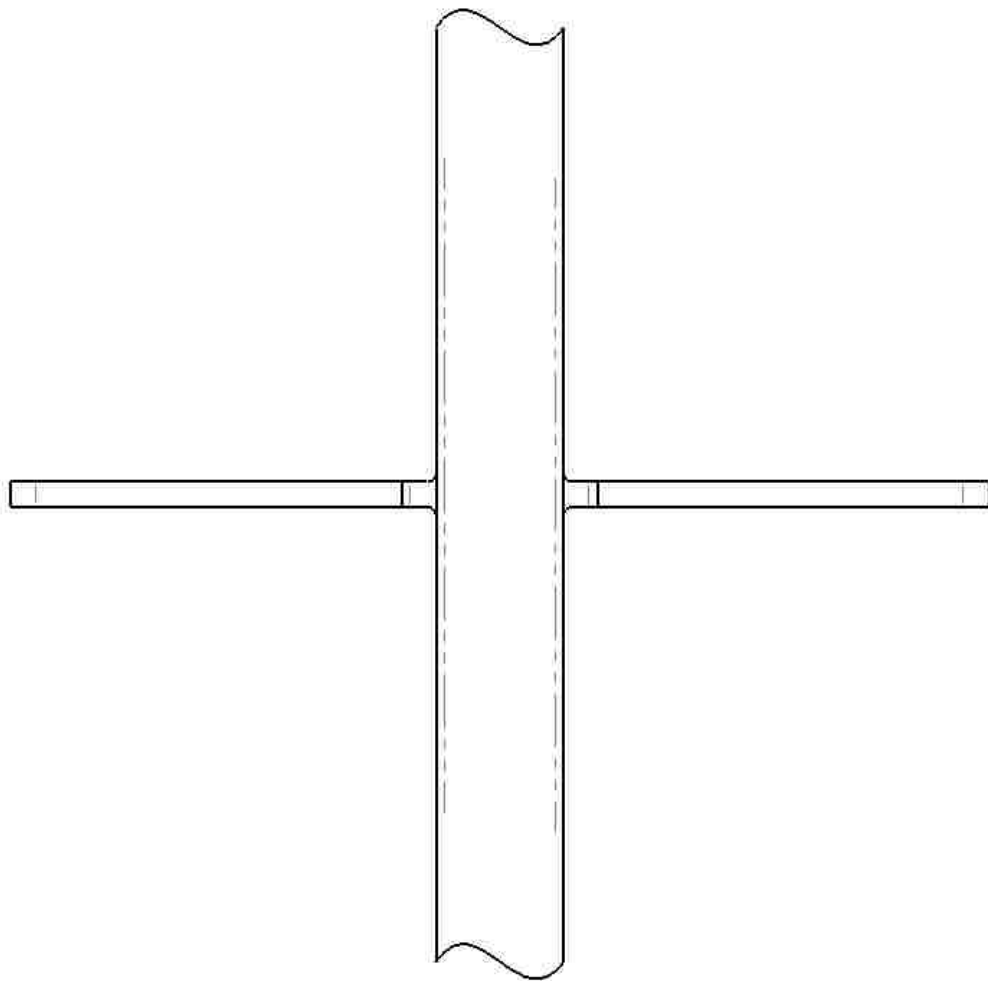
Side View. Bi-Cantilevered Drain/Cantilever composed of a Rectangular Drain and two Rectangular-shaped Cantilevers attached to the Width.
